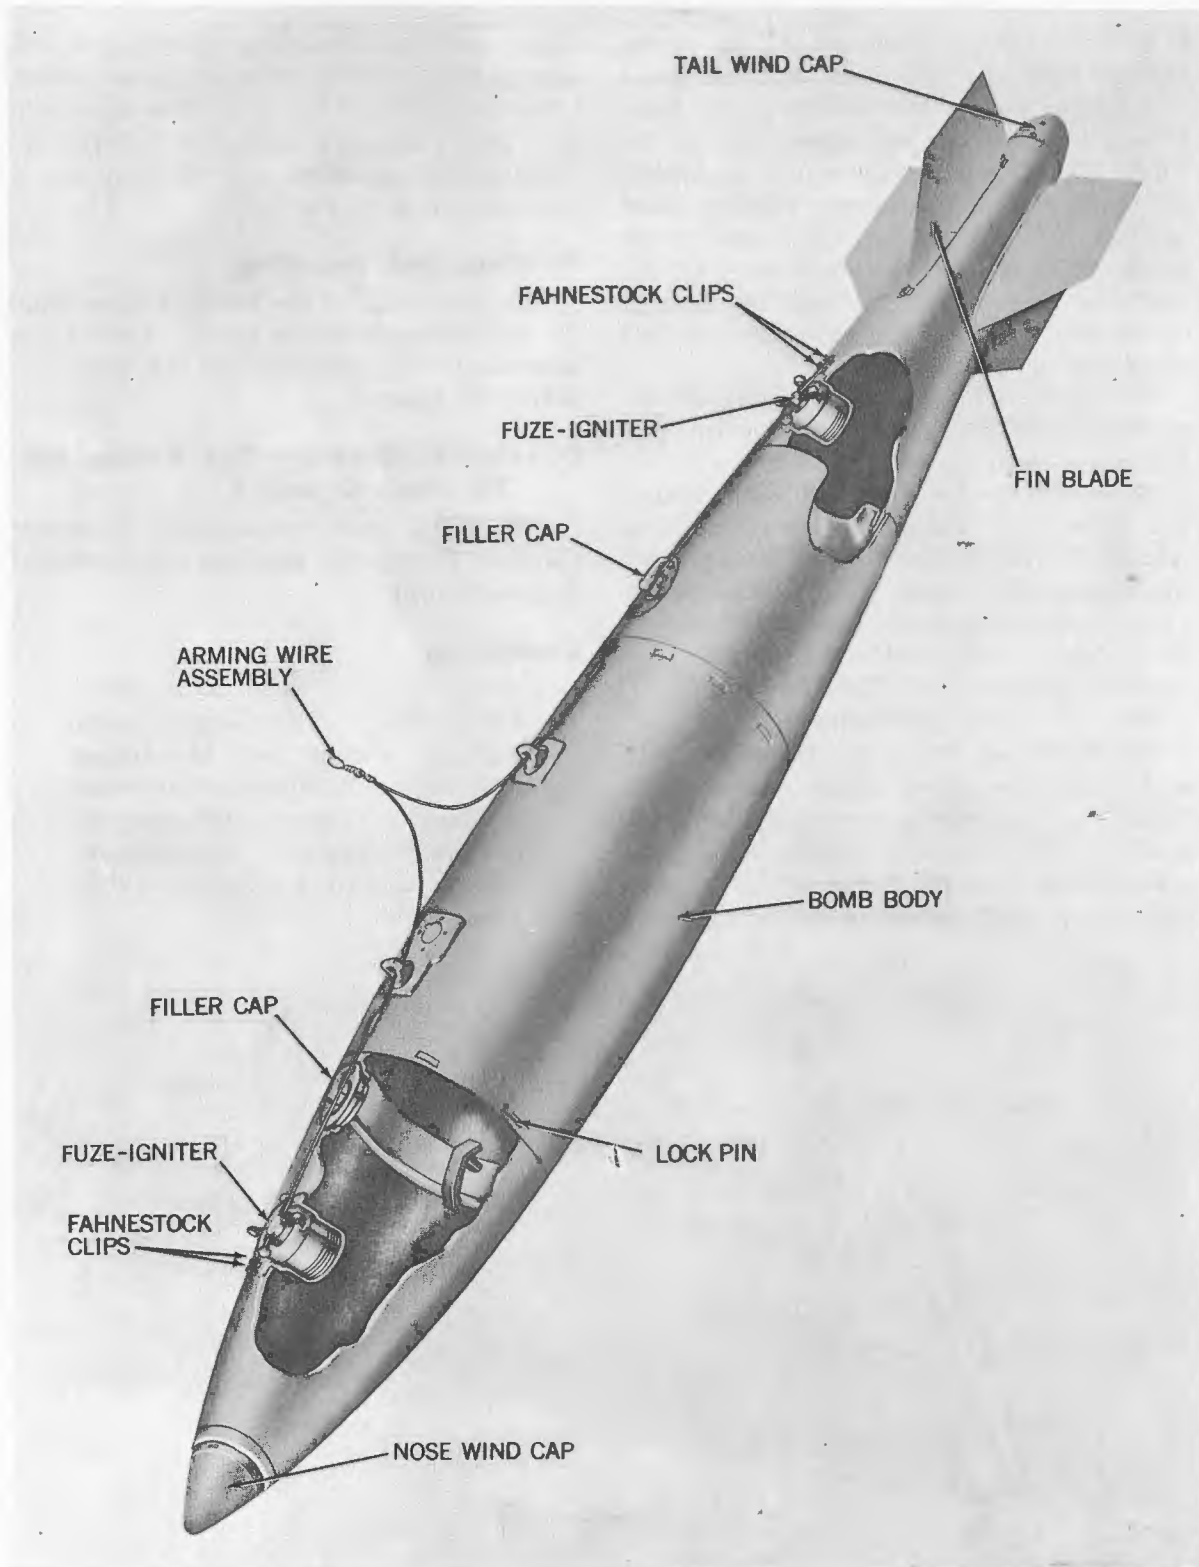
1000-lb Fire Bomb Mk 79 Mod 1, Cutaway View.
